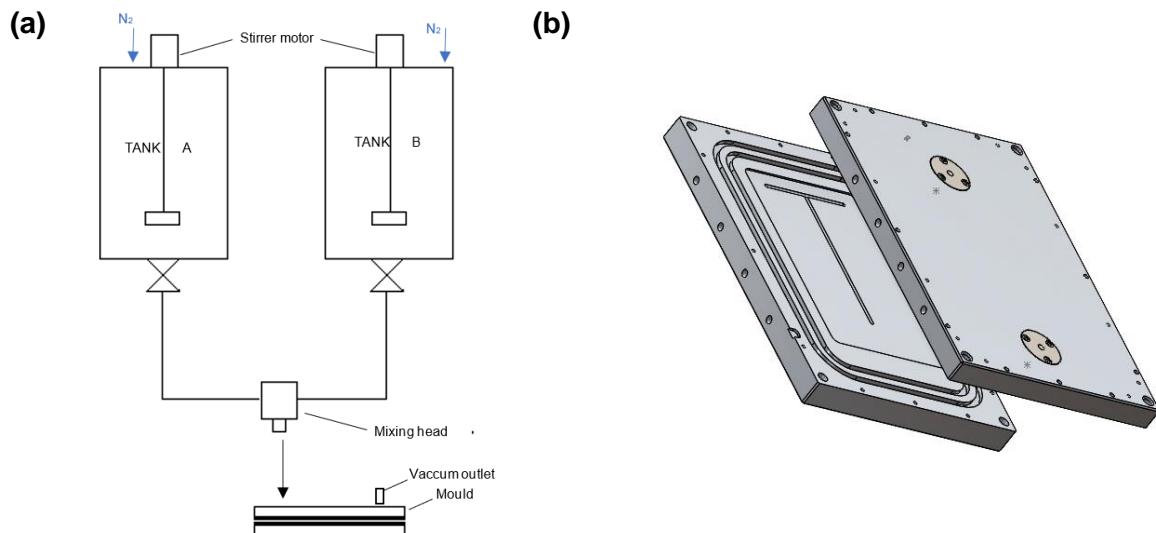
(a) Schematic diagram of prototype T-RTM equipment and (b) CAD image of the mould.
